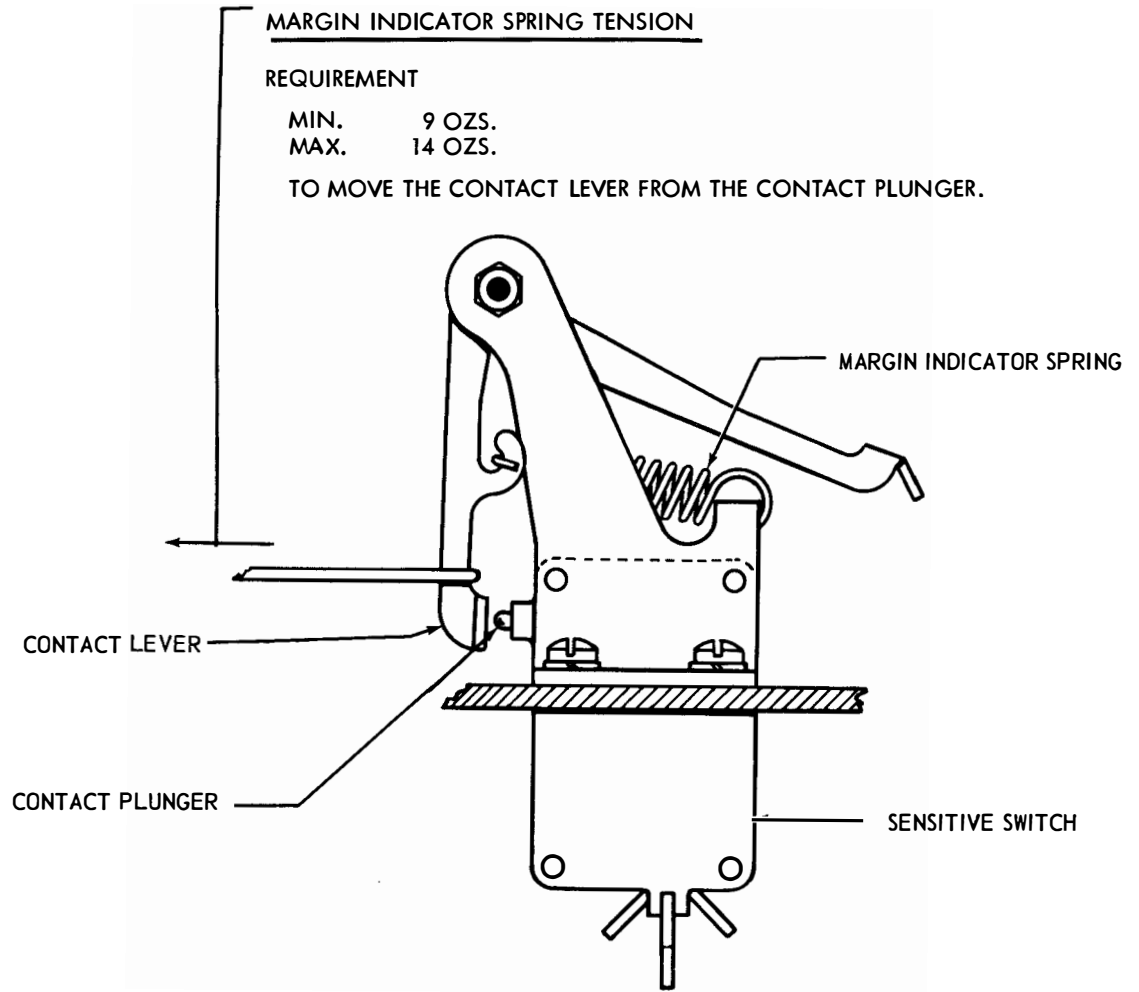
Keyboard, Margin Indicating Mechanism, Front View
